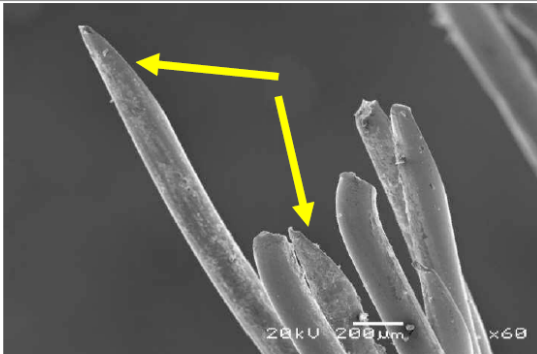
Fractograph showing outer strand wire fractures (x60, SEM)
